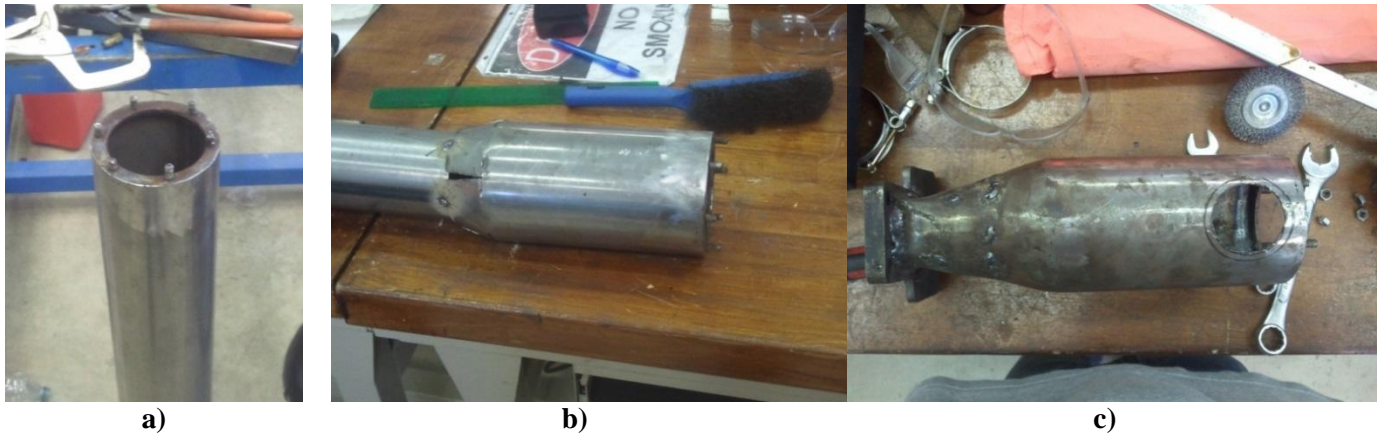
Combustor Fabrication; a) Combustor first look, b) welding process, c) air hole
